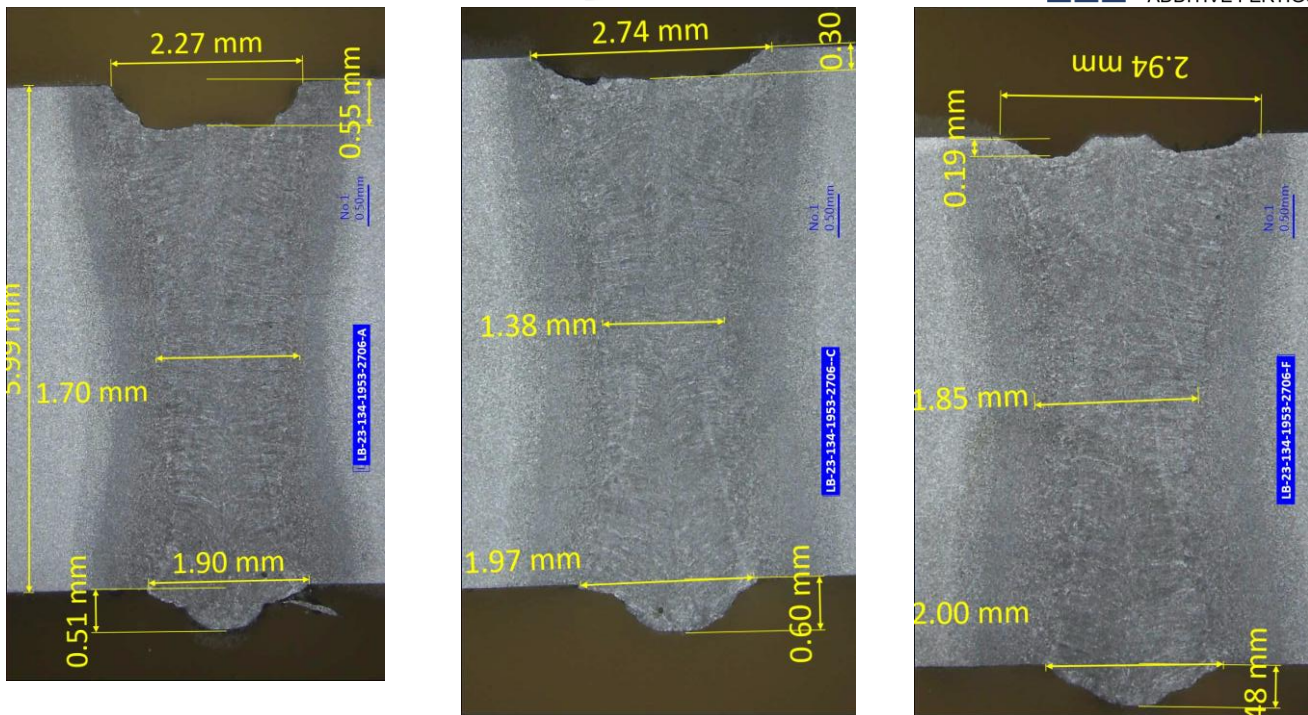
Transversal cross section (Nital etched) – S355J2+N with the Beam Shape `InwardsU+OnePoint`
